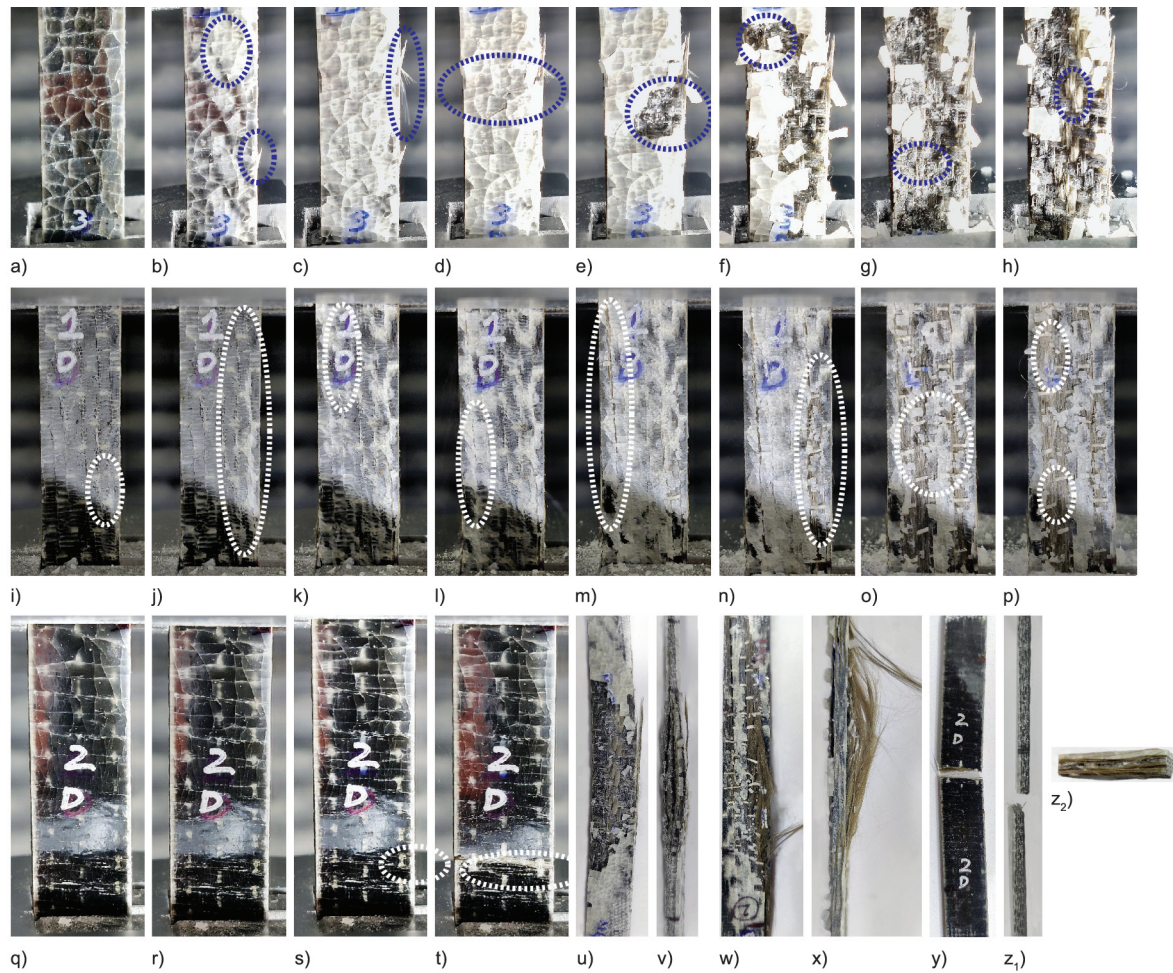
The tensile testing stages of abrasive waterjet machined specimens, (a to h) failure process of BDAW, (i to p) failure process of UDLaw, (q to t) failure process of UDTAW, (u, v) top view and side view of failed BDAW, (w, x) top view and side view of failed UDLaw, (y–z₂) top view and side view of failed UDTAW.
